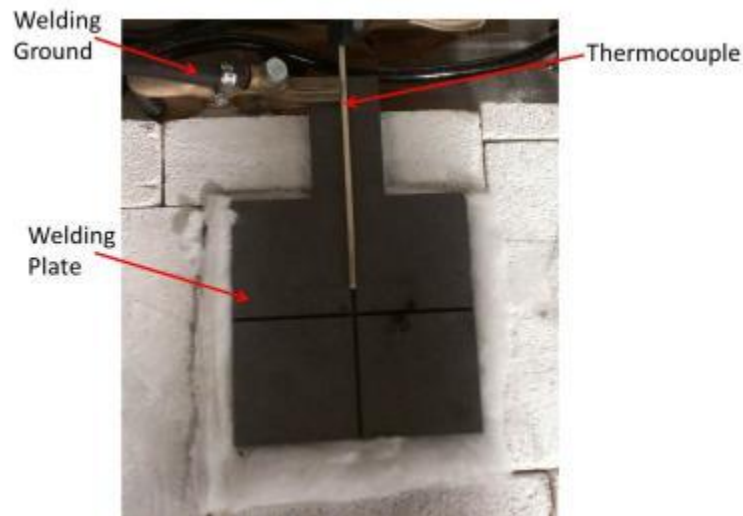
Covered welding furnace. The welding plate serves as contact with the specimen and ground. A graphite element under the welding plate heats the welding plate and the specimens to be welded. A type-B thermocouple measures temperature.
